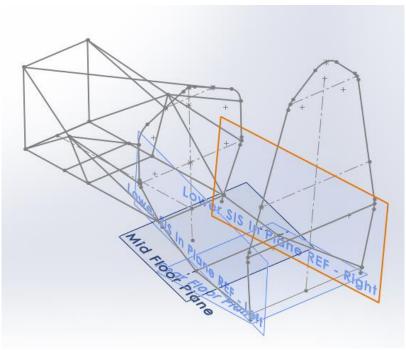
Isometric view of frame showing the 4 planes used to sketch the cockpit floor
